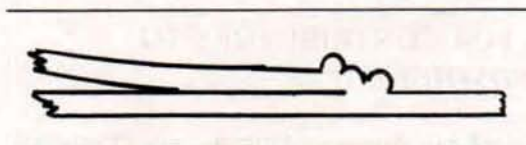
Lap weld. One central weld and two reinforcing welds generally suffice for most orthotics and prosthetics uses.
